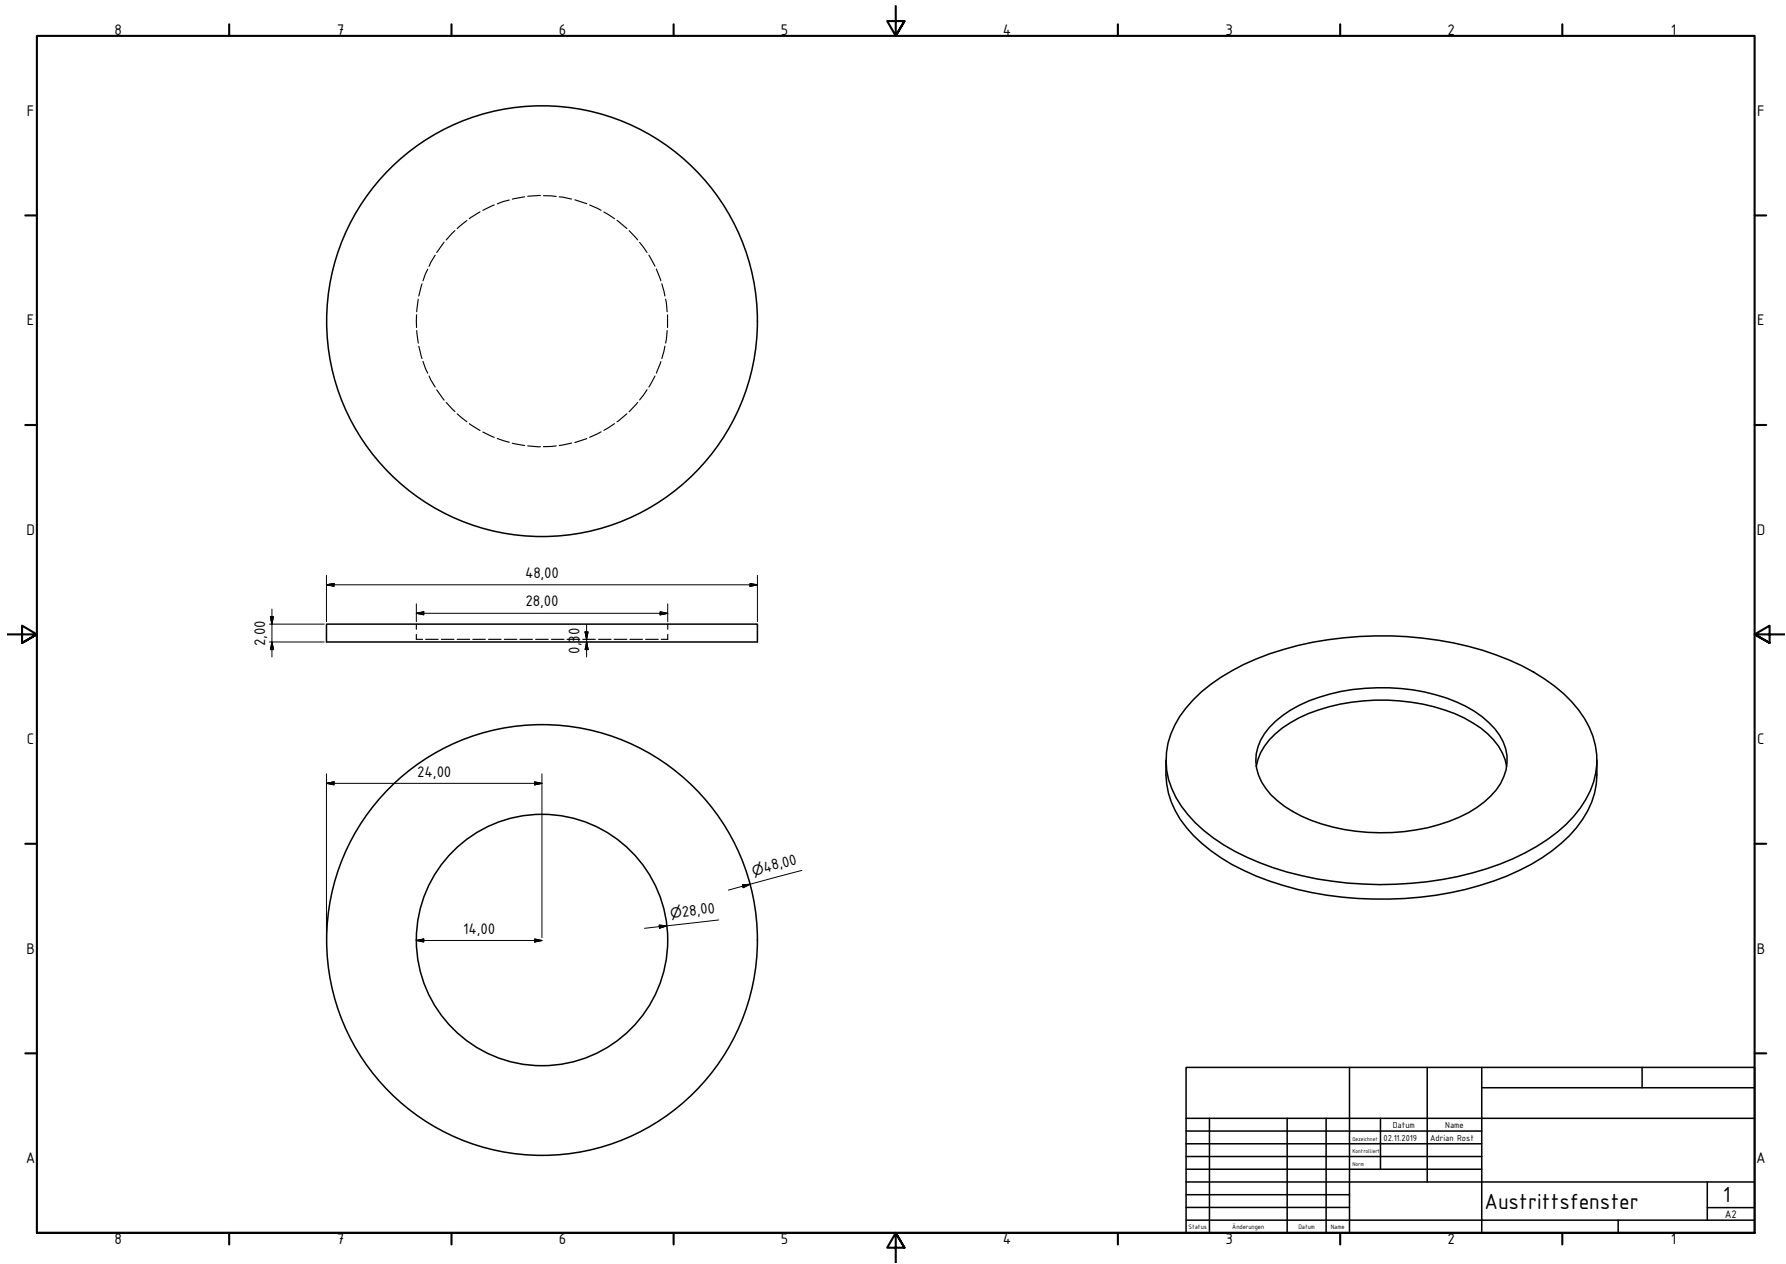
Aluminum exit window for a CF-40 flange which is installed instead of a gasket.
